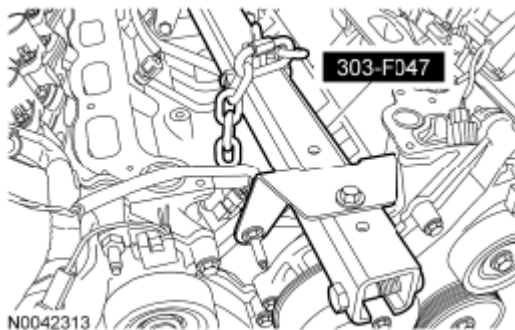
Identifying Engine Lift Bracket (303-F047)
